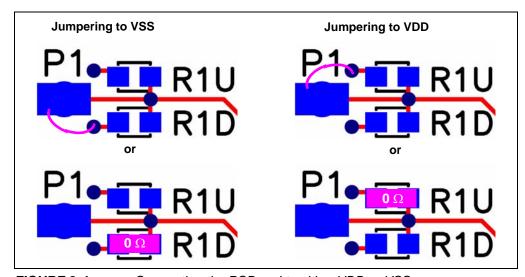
Connecting the PCB pad to either VDD or VSS.
